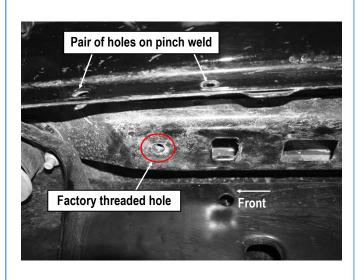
Driver Side Center & Rear Mounting Location (Vehicles with open mounting location)
